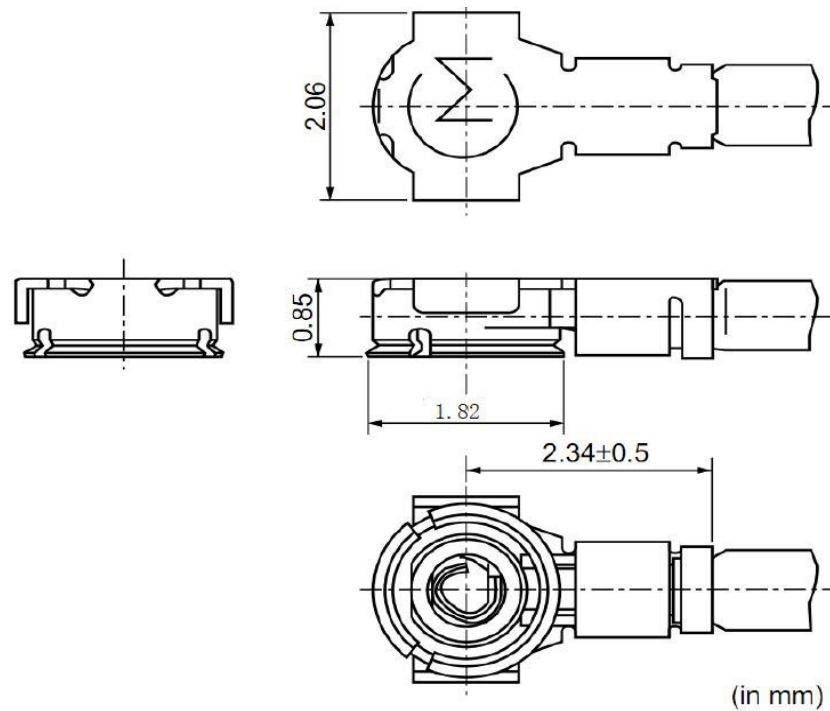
Dimensions of Mated Plugs (\varnothing 0.81 Coaxial Cables) (Unit: mm)
